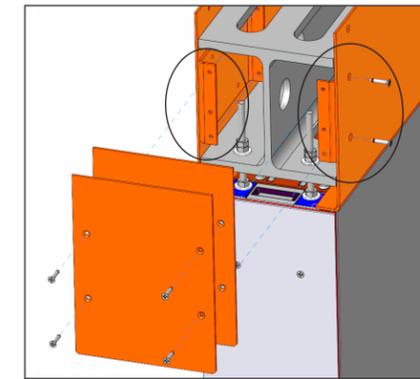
Attach Multi-Bracket to Beam Shroud
